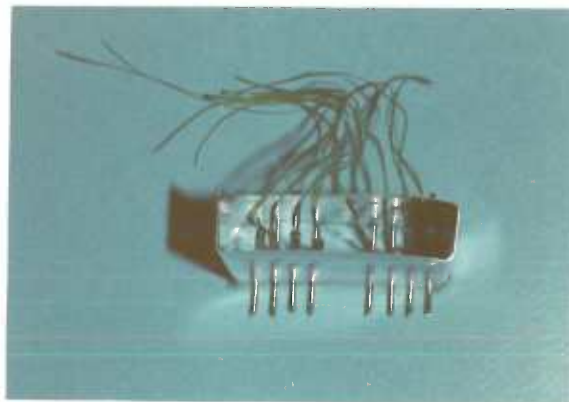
Aluminum jig with 8 chains on .062 SS wires.
